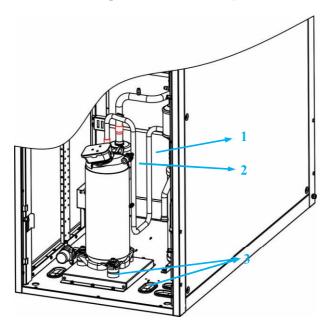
Schematic diagram of Remove compressor for 40-60 kW model
